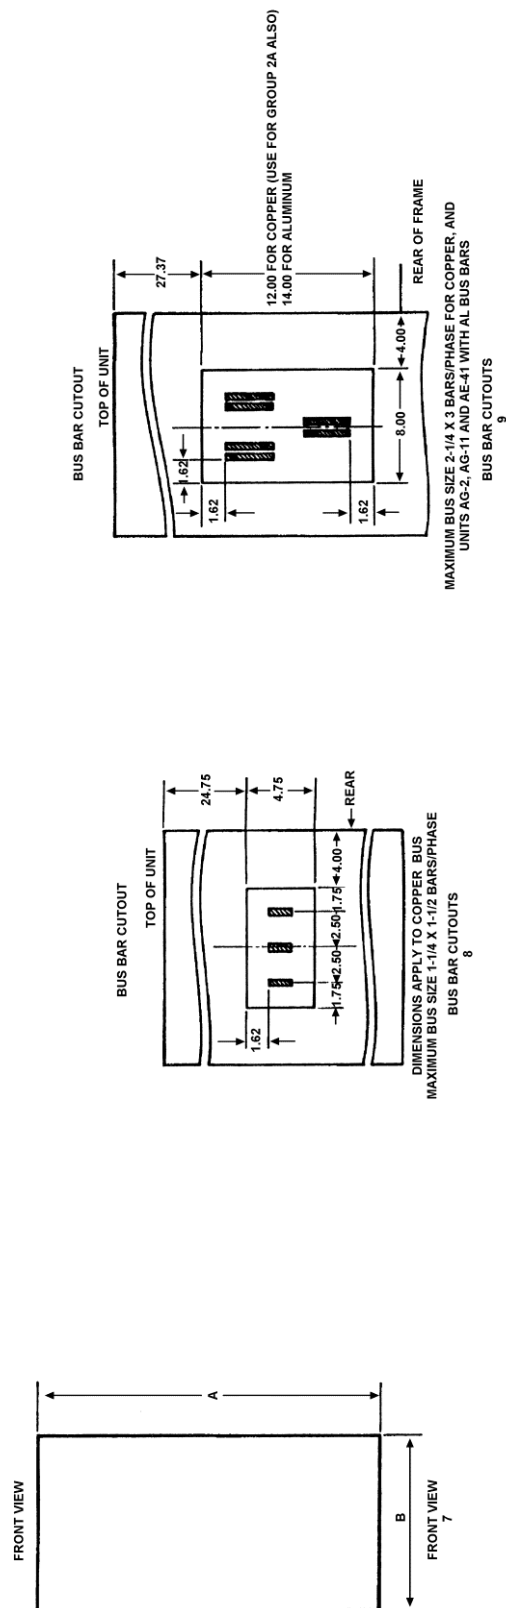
Standardized switchboard plans (sheet 1 of 2).
